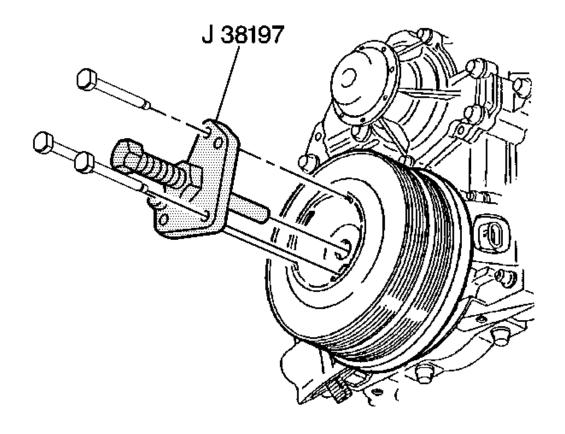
Removing Crankshaft Balancer Using J 38197-A Courtesy of GENERAL MOTORS CORP.
